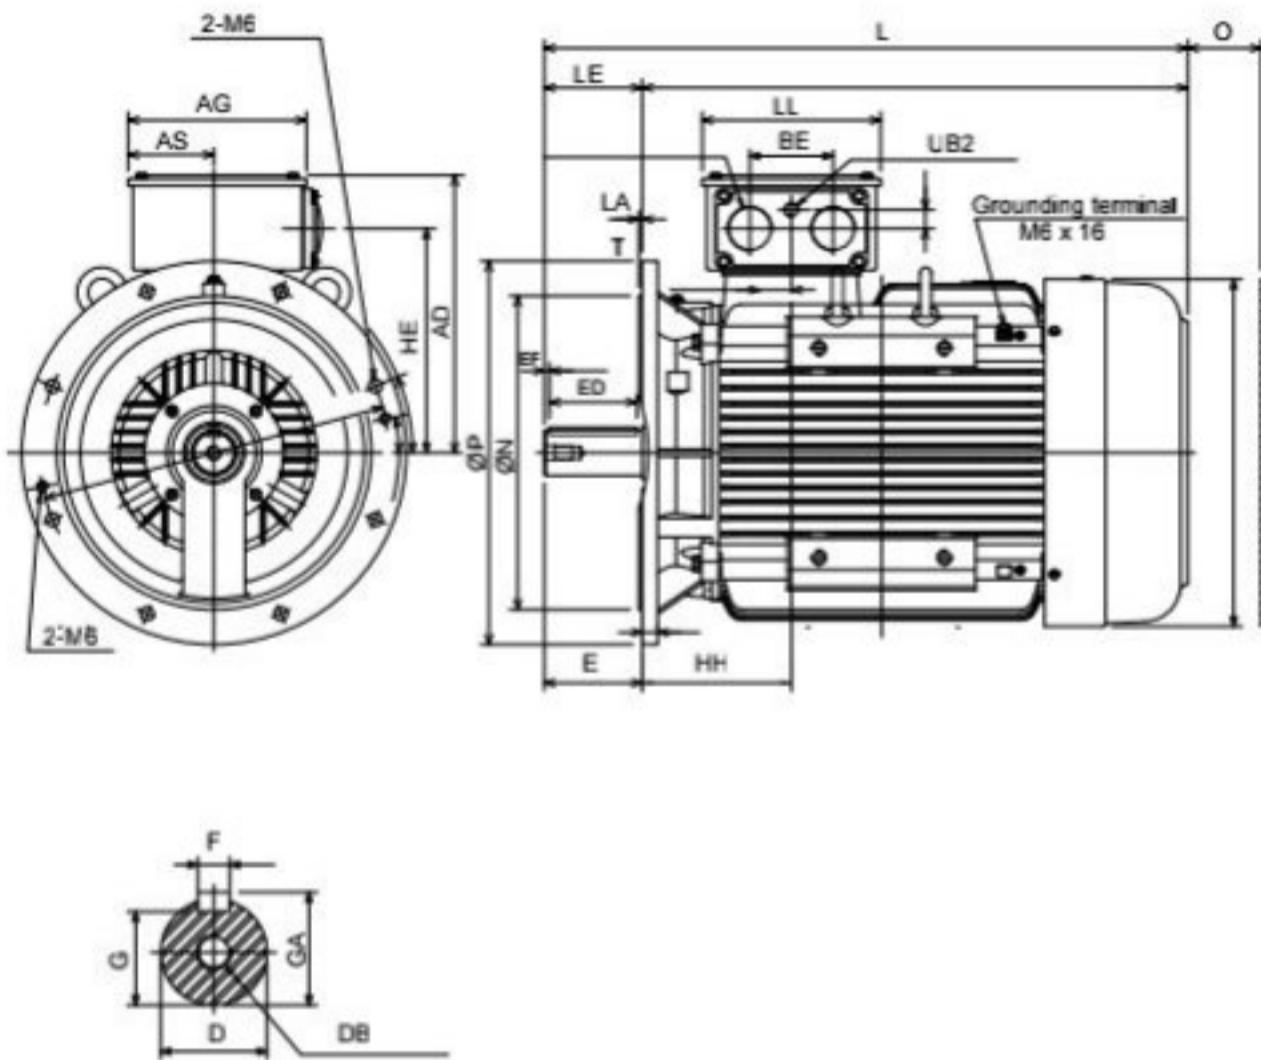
Outline drawing of cast iron design, flange version, mounting B5, frame size 225 – 250
